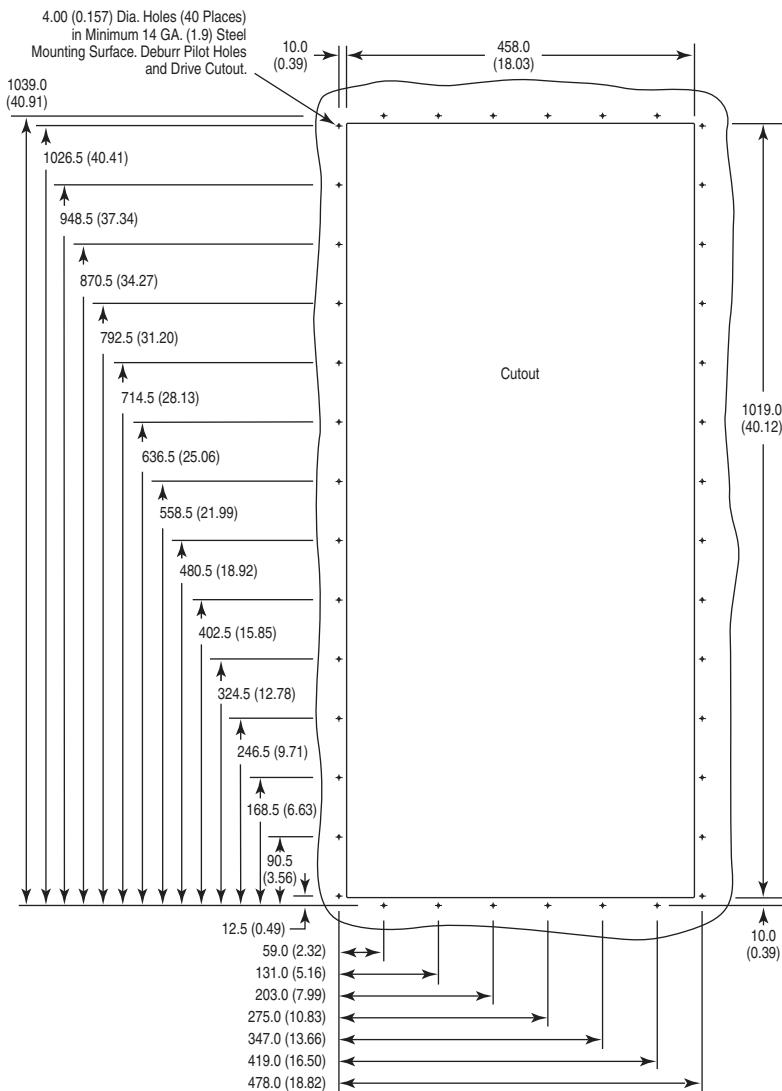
Frame 5 NEMA/UL Type 12 Flange Mount (400...690V drives only)
